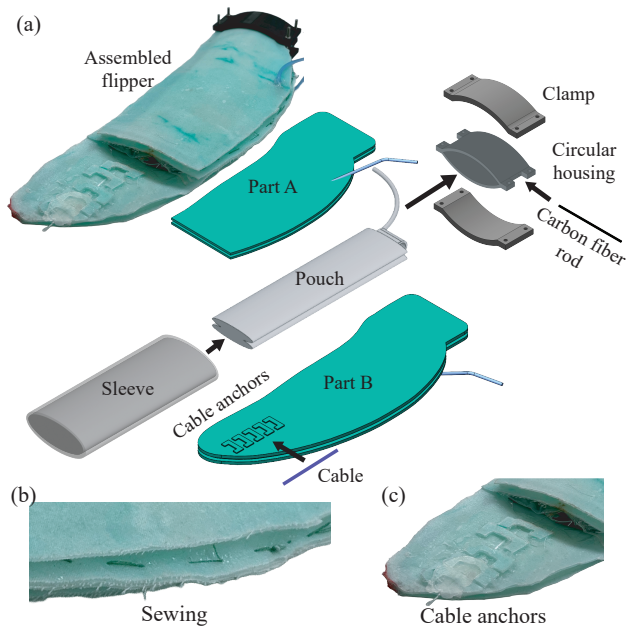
(a) The fully assembled limb, displayed with an exploded view. (b) The sewing method to attach Parts A and B of the layer jamming system. (c) Cable anchors constrain the cable that pulls the tip of the limb inwards.
